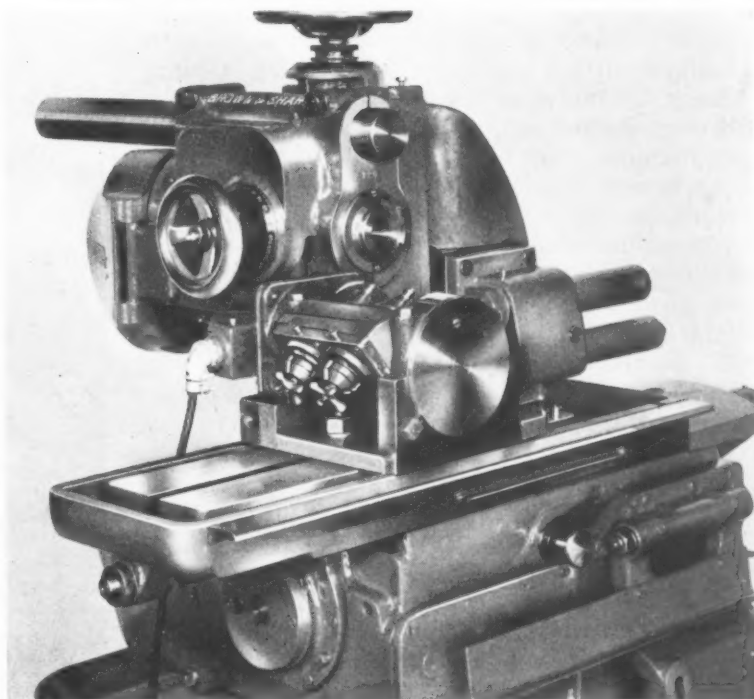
(Above) Cutting Clutch Teeth in a Mechanically Operated Indexing Fixture. Fig. 2. (Below) Cutting Short-faced Bevel Gears in Two-spindle Indexing Fixture
